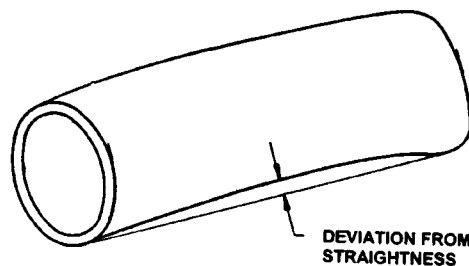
STRAIGHTNESS TOLERANCE FOR EXTRUDED ROUND TUBES
